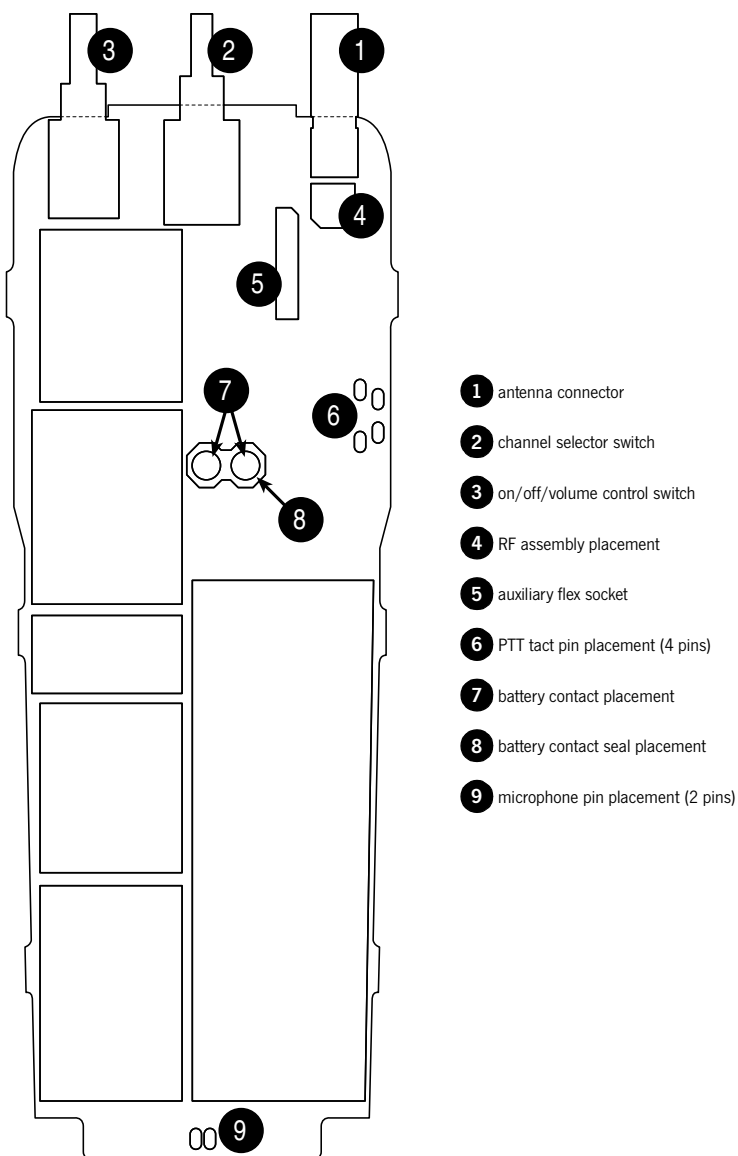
Top surface of PCB, which is visible only when the PCB has been removed from the chassis (Orca Elan or Orca Excel shown)
